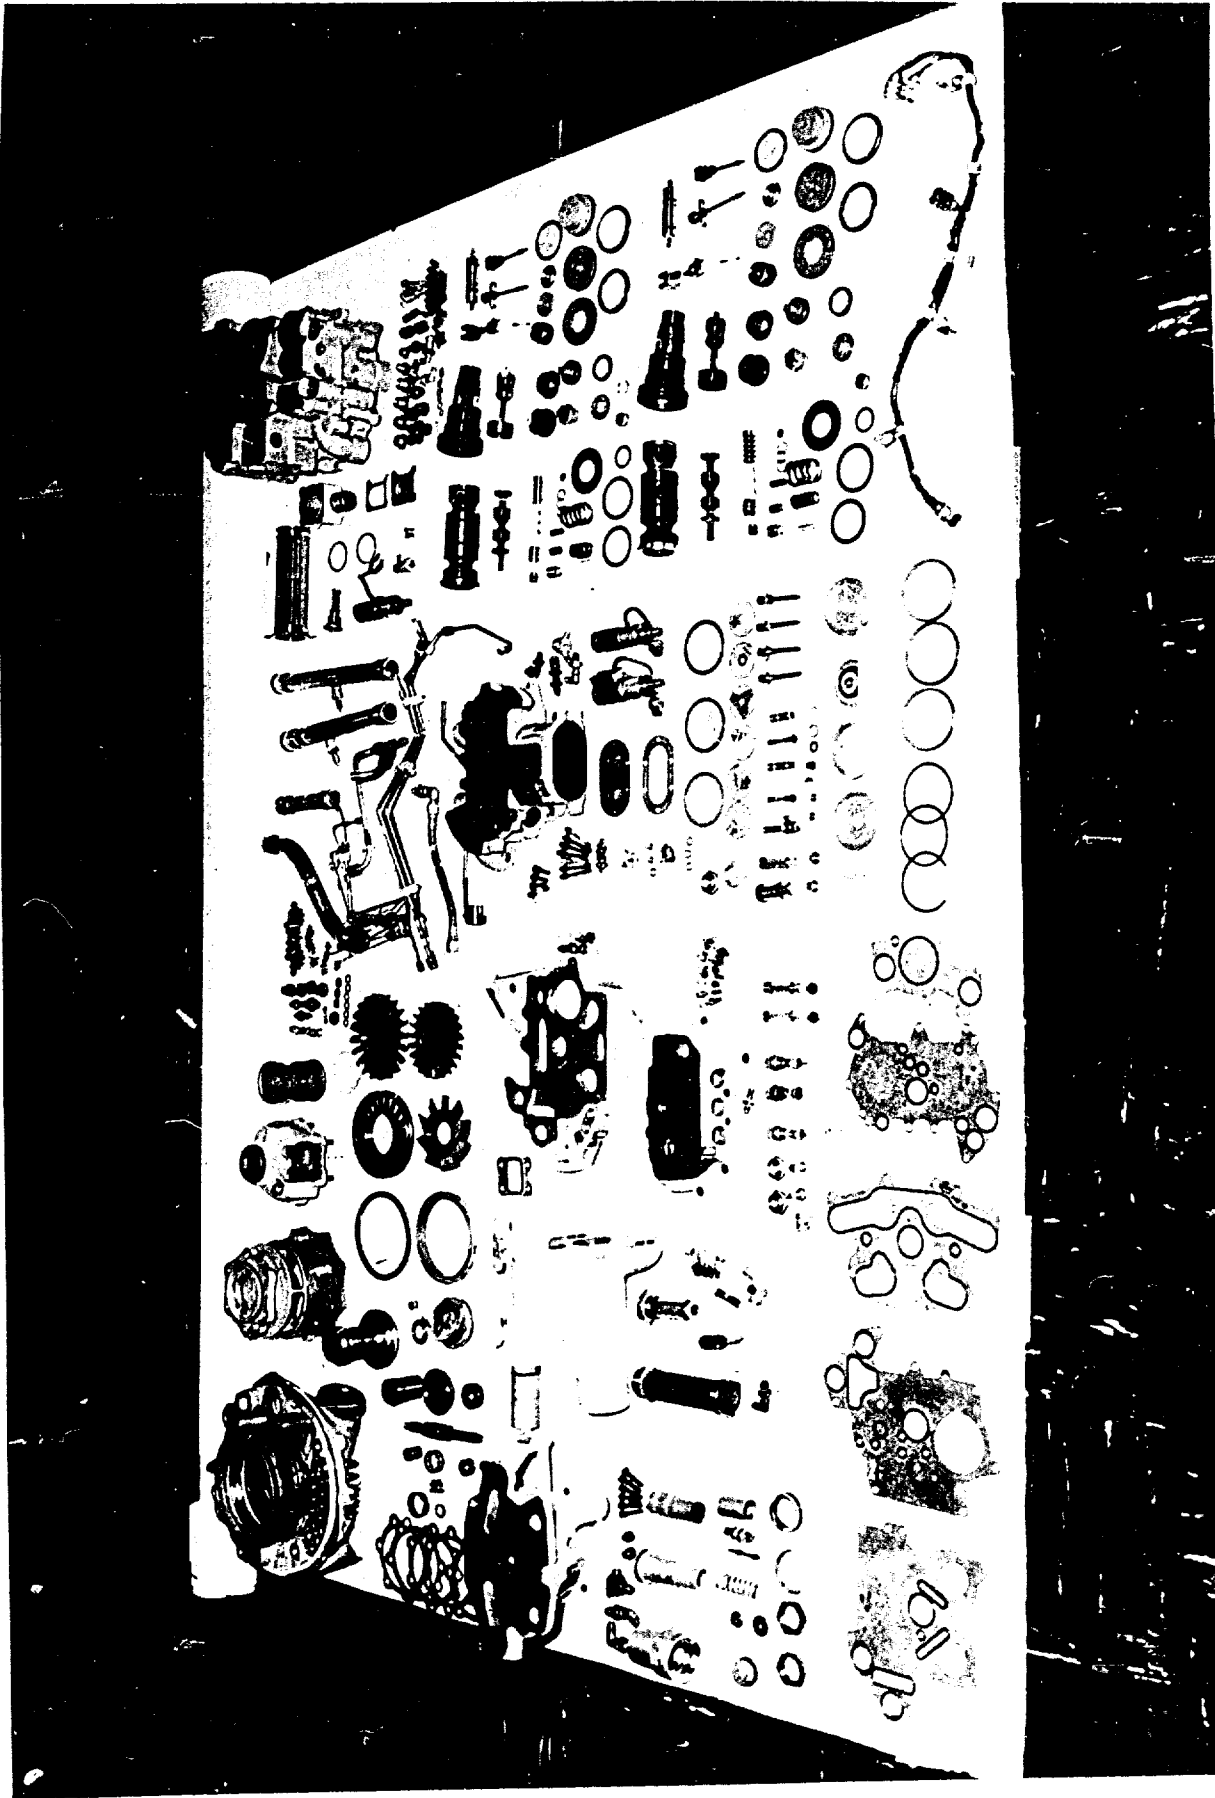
Disassembled Components of RJ43-MA-11 Fuel Control Unit Serial 001, From Engine Serial MA-E10011-2, Following the RJ43-MA-11 Phase II Long-Term Storage Test.
